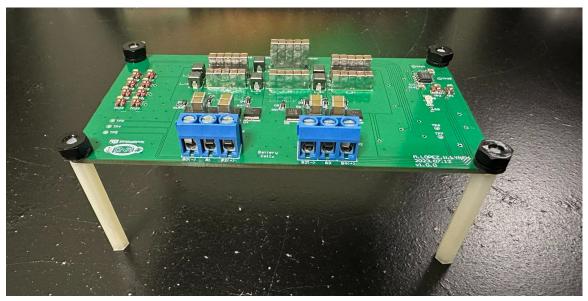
4S NCH+PCH Balancer PCB Top View
